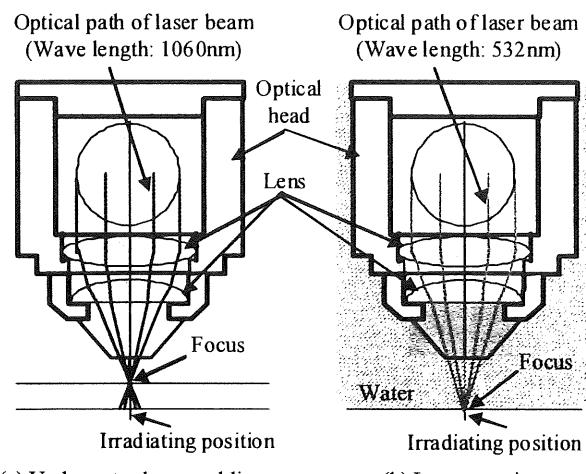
Schematics of optical path on multifunction laser welding head
